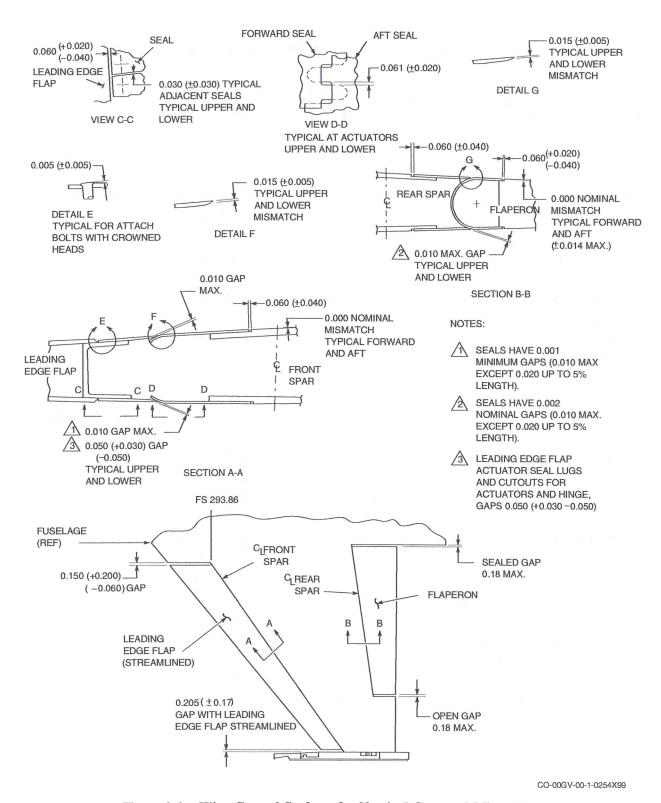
Wing Control Surfaces for Nominal Gaps and Mismatches.
